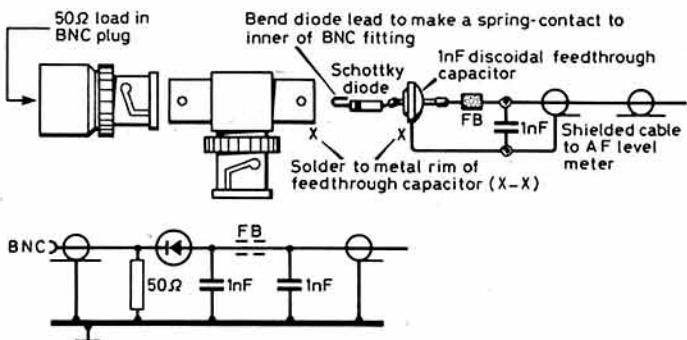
Exploded view of a detector and 50Ω load using a BNC T-fitting
